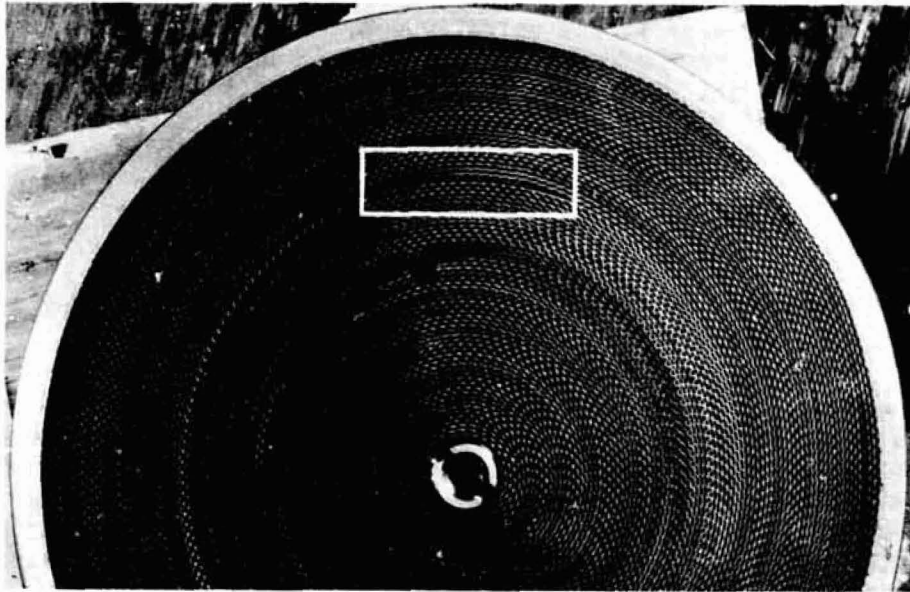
Spiral-Wound, Crimped Stainless-Steel Ribbon Core Element, 30.5-cm Diameter by 15.2-cm Length, Posttest
